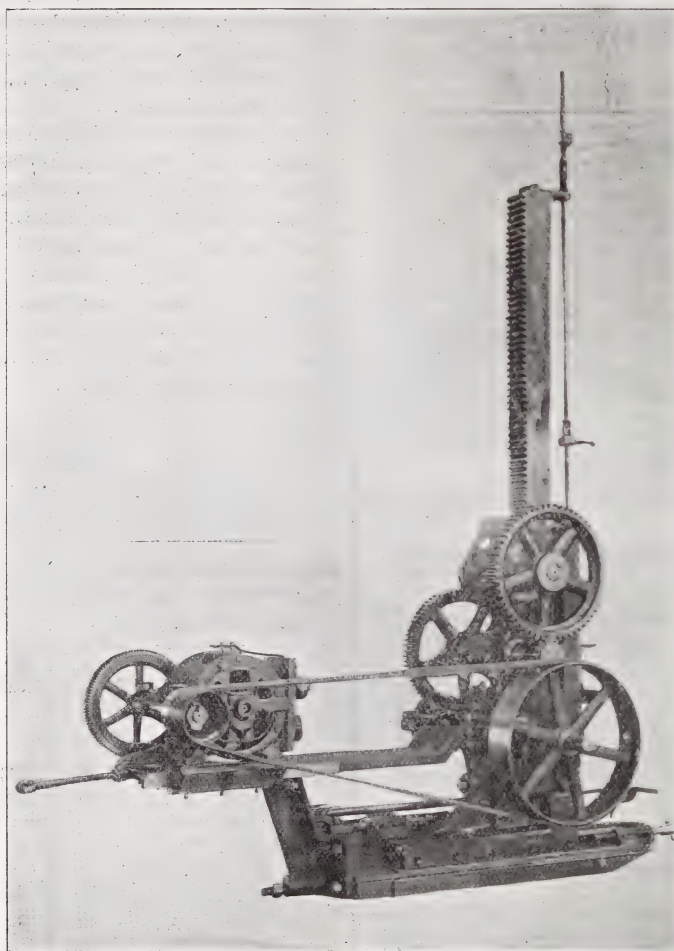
PORTABLE SLOTTING MACHINE WITH GEARED THREE-PHASE MOTOR OF $\frac{1}{2}$ B.H.P. AT 1,425 REVOLUTIONS PER MINUTE.
